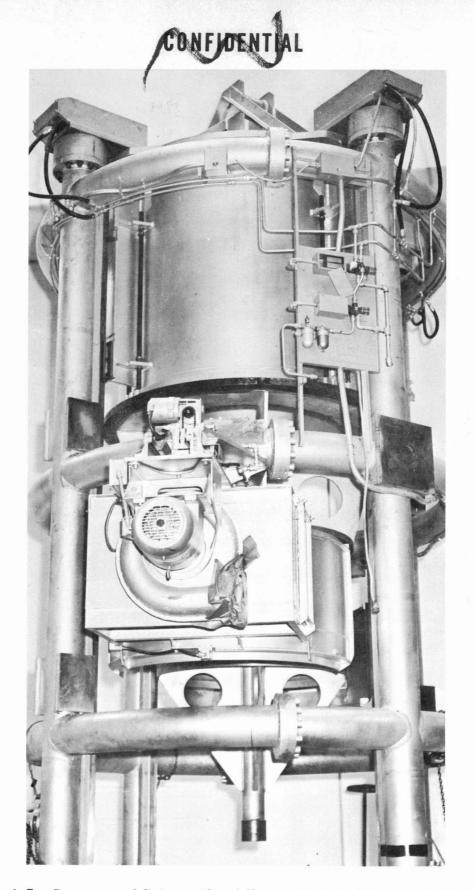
Core removal fixture. After full power tests had been run in the IET, the power plant was returned to the Hot Shop for repair or disassembly. The core removal fixture was used both for inserting and removing the reactor core and shield plug from a close-fitting pressure vessel.
